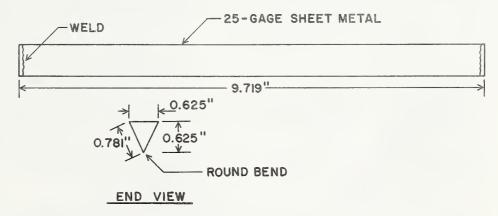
Details of mix tray used for measuring planting mixture.
